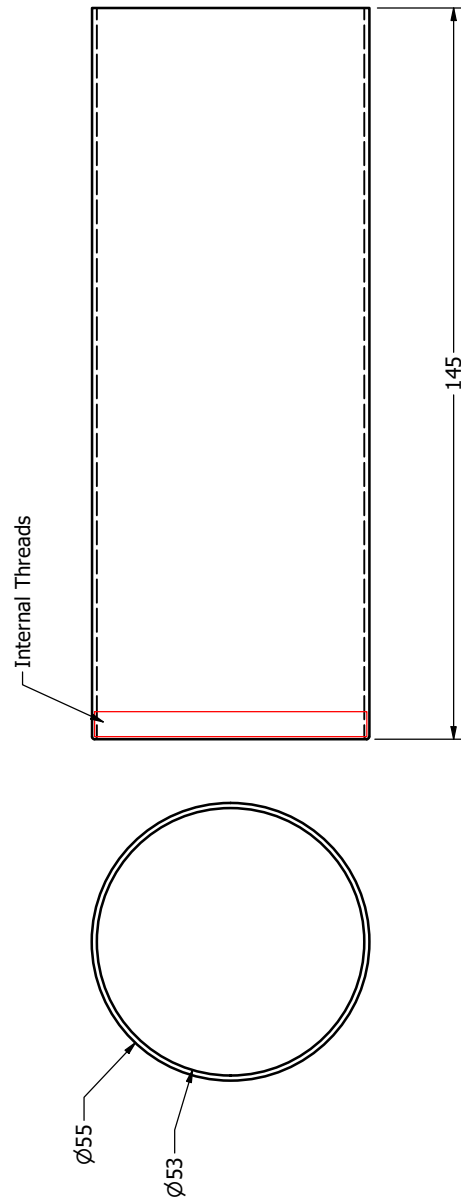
Technical drawing of the bottom part of the Pierce electrode (Dimensions in [mm]).
